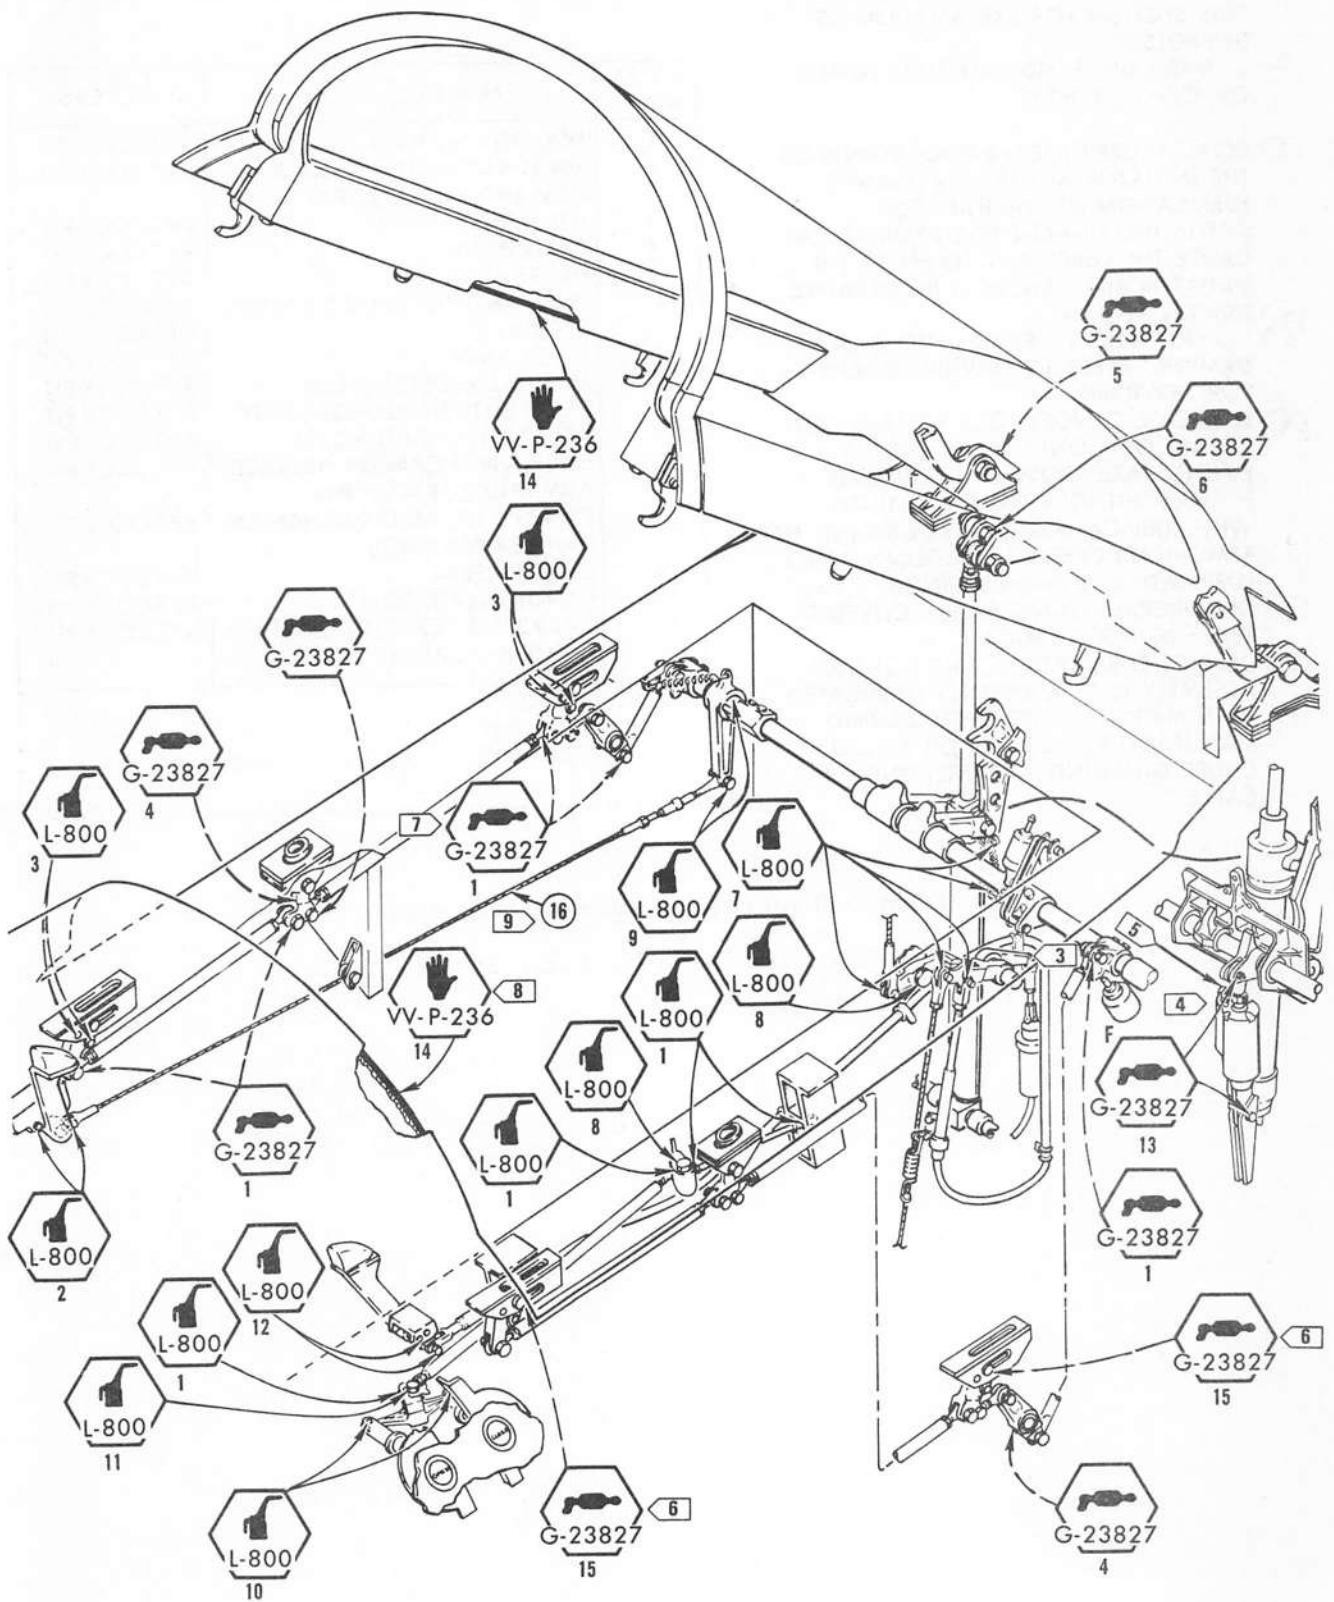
Aft Canopy Lubrication (Sheet 1 of 2)
